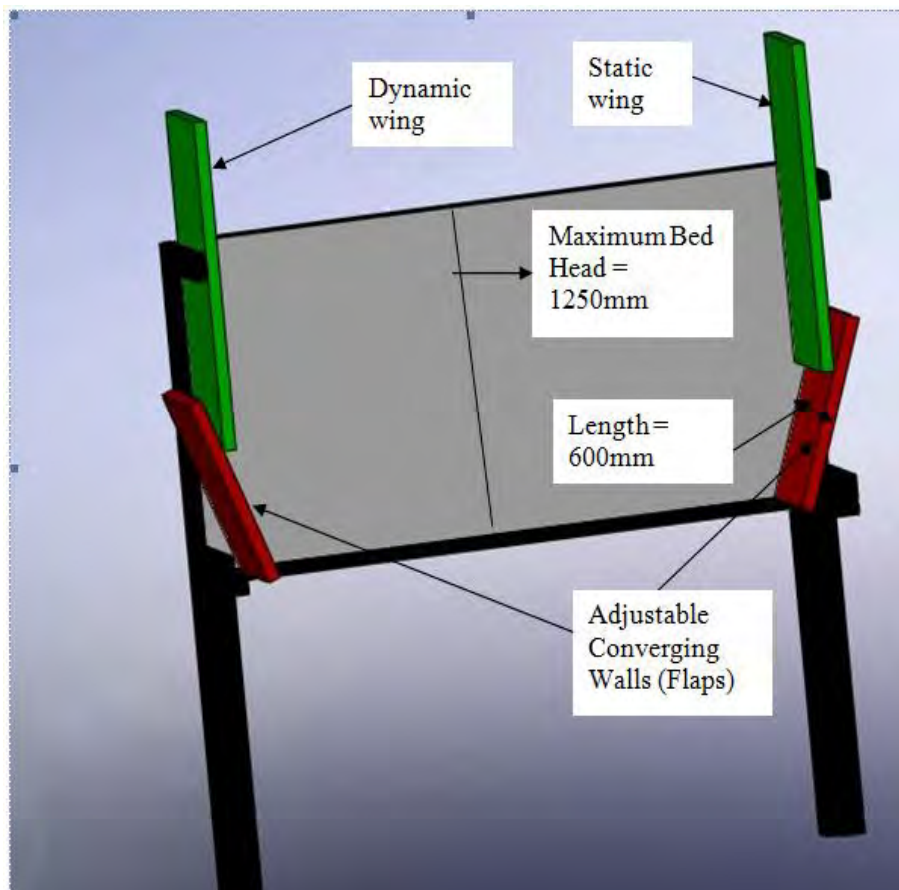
New Adjustable (Wedge-shaped) Hopper (Internal Surface)
